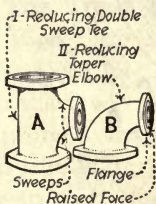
Extra Heavy Cast-Steel Fittings.
